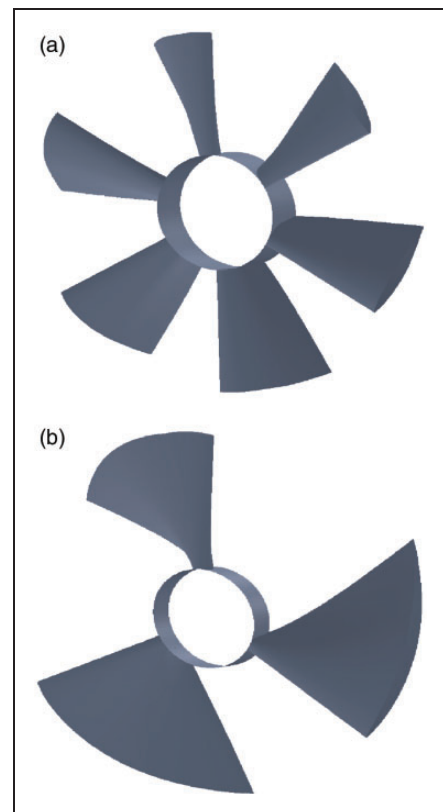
Case 2: reference rotor CAD versus optimal rotor CAD (NSCS). (a) Reference rotor CAD and (b) optimal rotor CAD.
